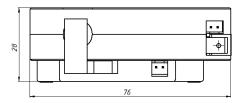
Promix-SM.420.10.1 lock overall dimensions (see mounting dimensions on Fig.4)
